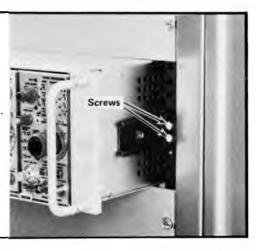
Adjusting the slide-out tracks for smooth sliding action.
